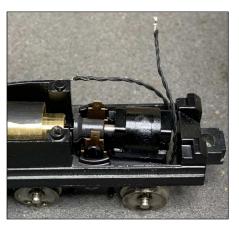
, 35, 36] show the truck reassembly. I added a drop of gear lube onto the worm gear and shaft connection as well.
